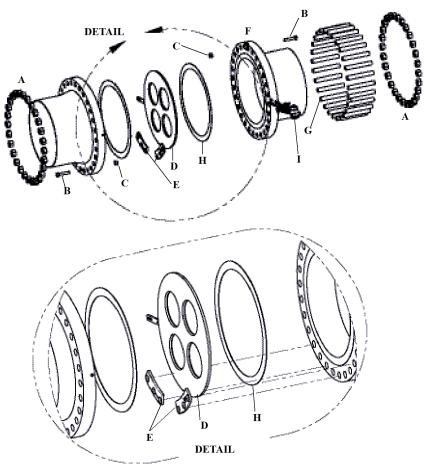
Rosemount 1595P (sizes > 24 in. (600 mm)) installation
